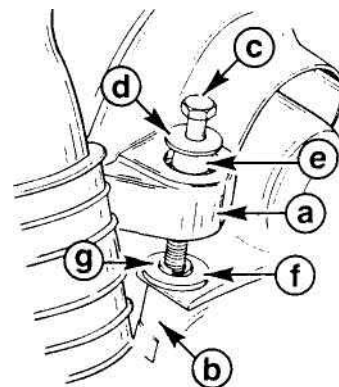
Bolts tightening between the engine and transom supports. a) engine support; b) transom support; c) bolt; d) lock washer; e) spacer; f) spring washer; g) lock washer with double helix.
